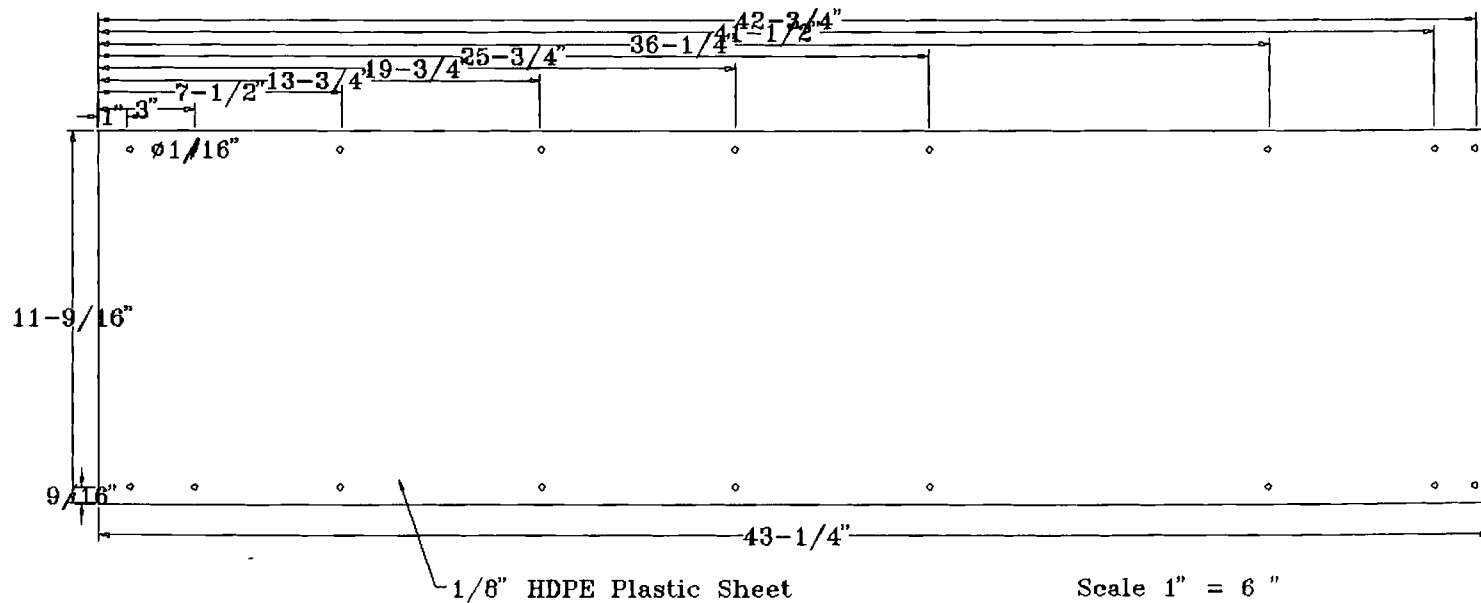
Conveyor Plastic Cover, Part #8, with Attachment Brackets
